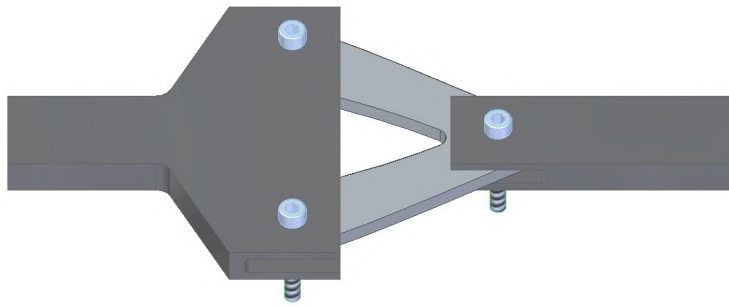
CAD representation of the assembly of the 3PT testing setup
